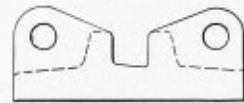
SECTIONAL VIEW AND FLANGE OF BASE PLATE.
